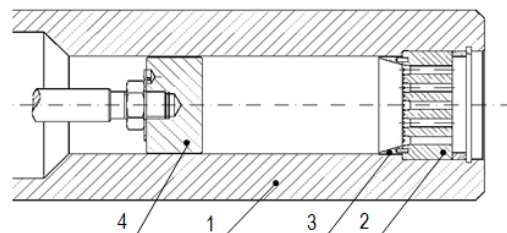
The processing assembly of the piston extrusion machine: 1 – cylindrical extrusion tube, 2 – multi-channel die plate, 3 – compression tube reducer, 4 – piston (P.419432)
